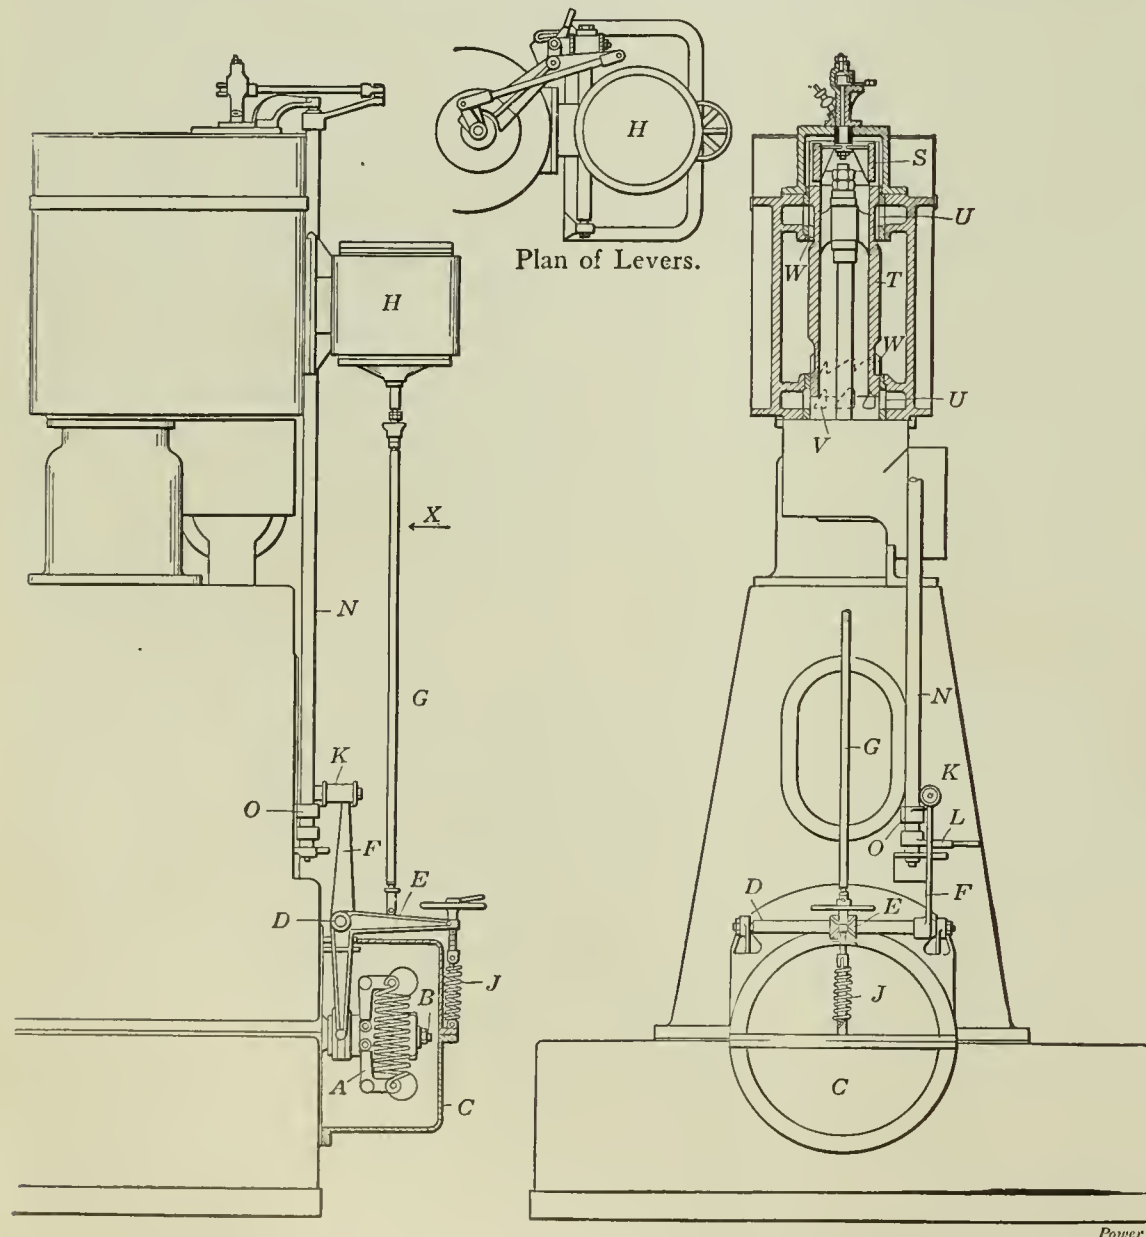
GOVERNING GEAR FOR SMALL HIGH-SPEED ENGINES
